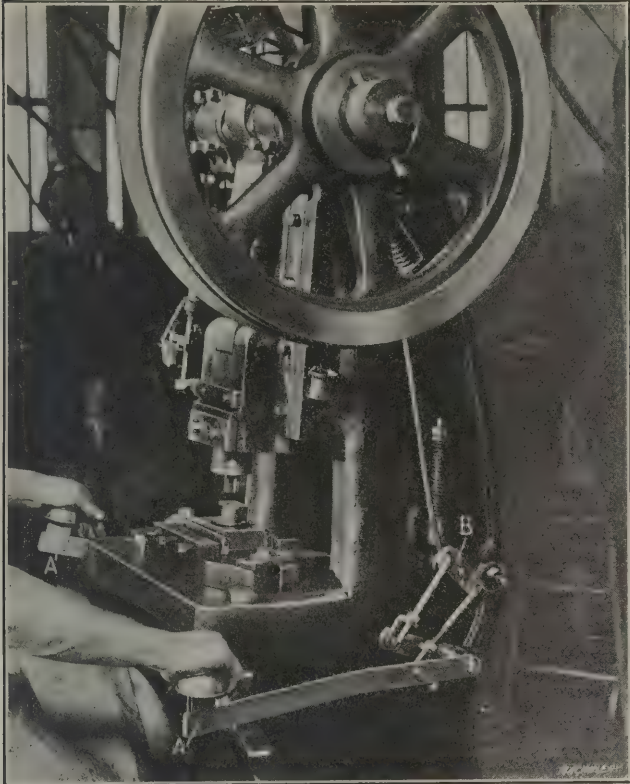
Arrangement of the Benjamin Stamping Press Guard
